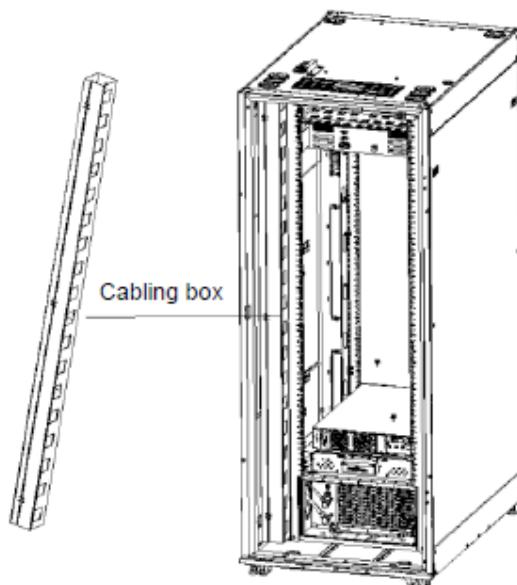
Cabling box of the 800mm wide standard unit – Installation area at the rear door
